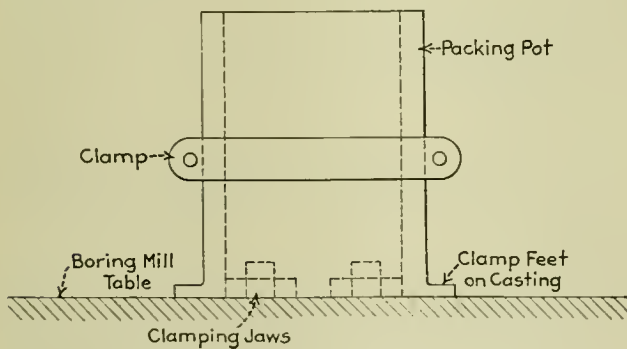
Cut Packing Pot Closed by Boring Mill Table Jaws and Central Clamp
